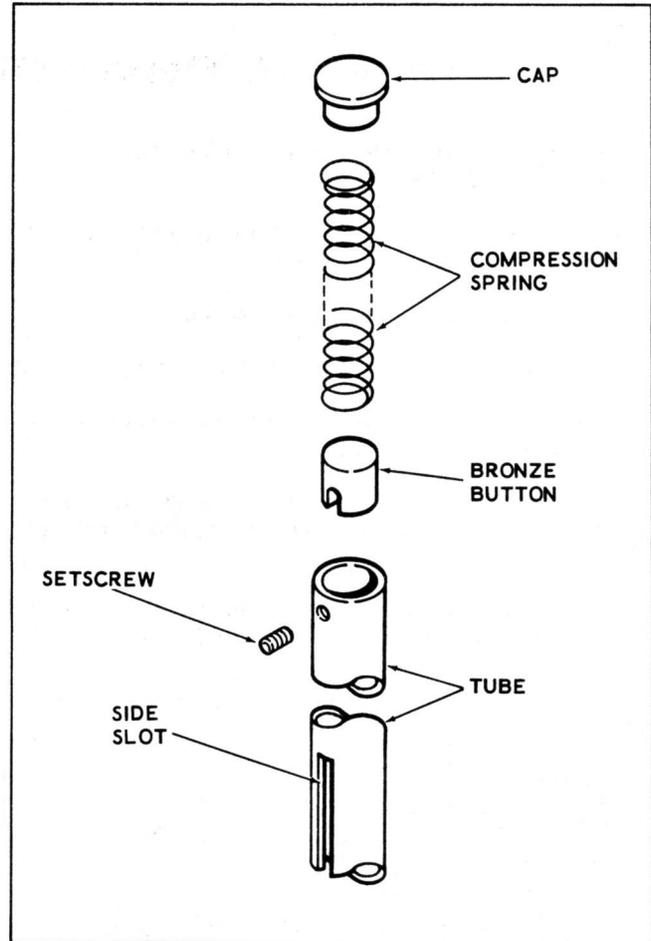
Replacing Dancing Roller Compression Spring and Button
